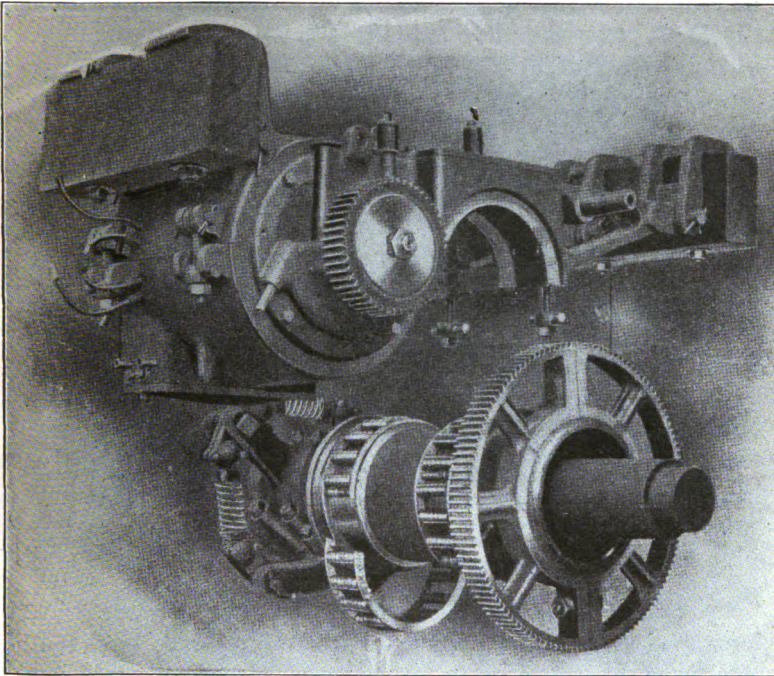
PLATE XXXVII.—SHOWING SPLIT SLEEVE AND DRIVING GEAR OF BLISS AXLE EQUIPMENT.
